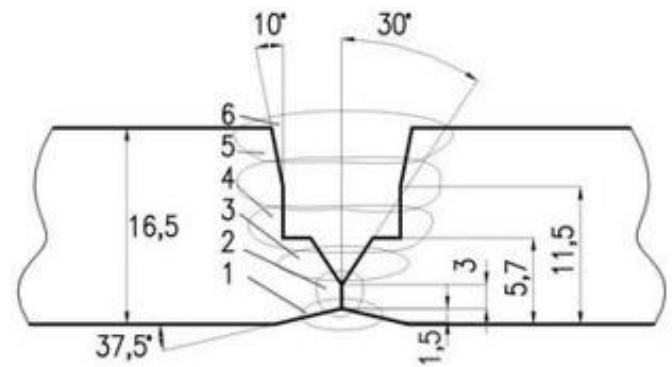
Computer aided design of compound beveling of butt girth welded joints of pipes, Fig. 5, Table 2 [1]
